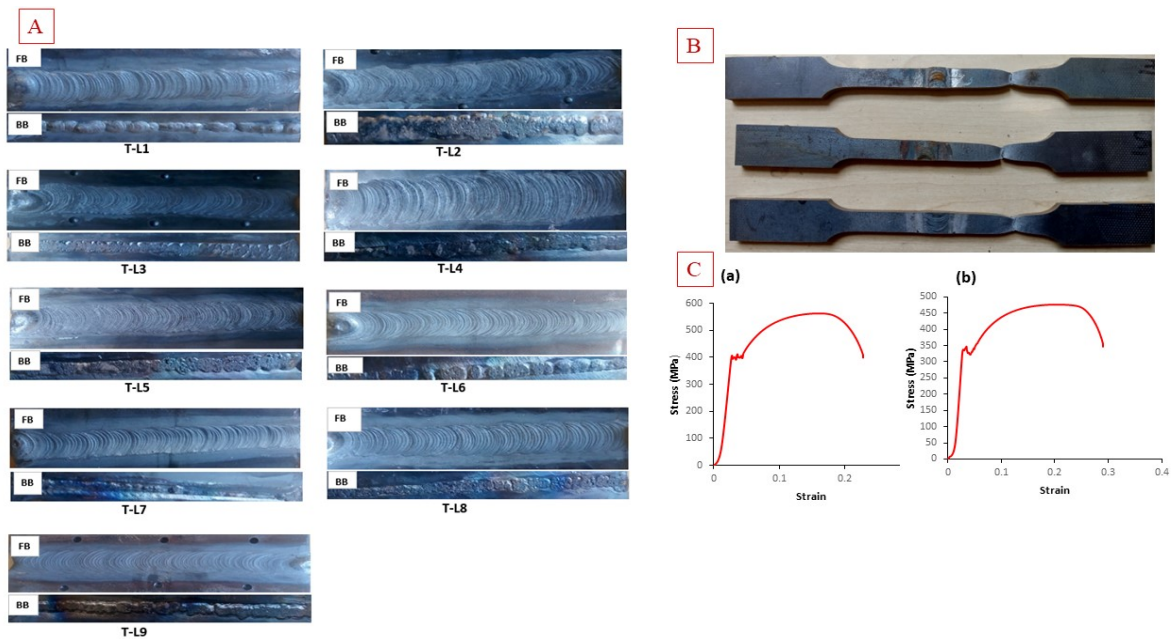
(A) welded specimens (B) fractured specimens (C) representative stress-strain
